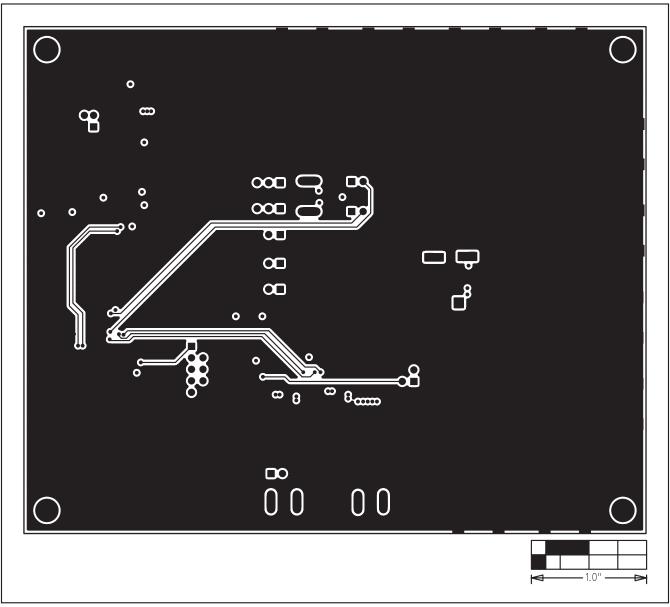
MAX9132 EV Kit PCB Layout—Solder Side
